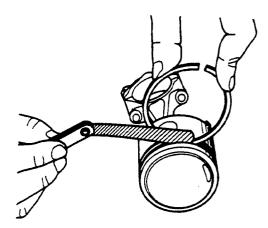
MEASURING PISTON RING TO GROOVE CLEARANCE
